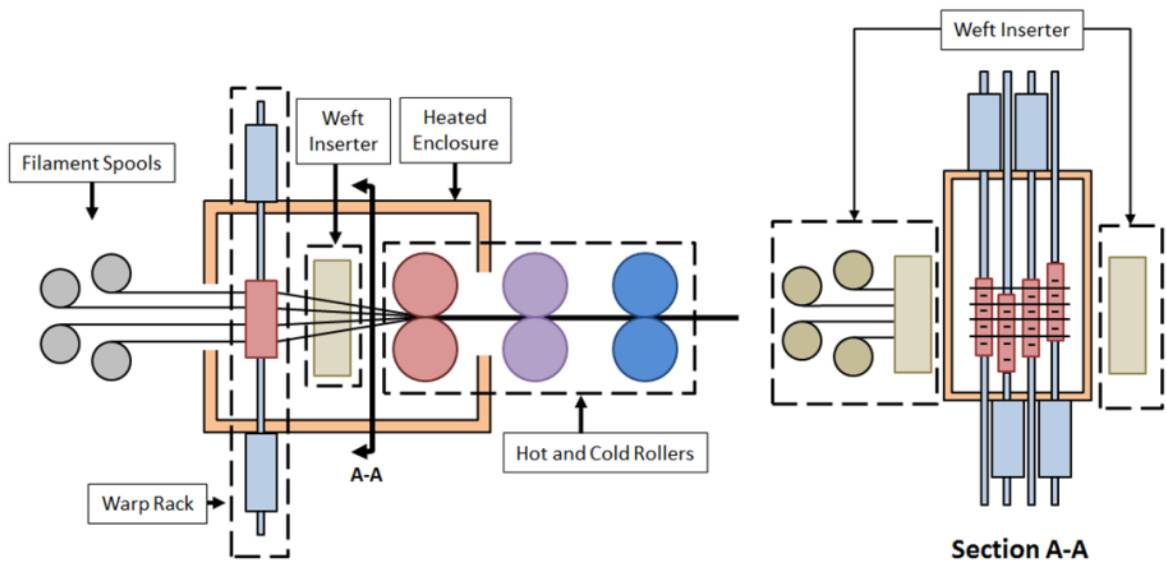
Diagram of WEAV3D machine. Left panel shows the side view of the machine. Filament spools shown in the left panel are warp filaments. Right panel is a cutaway along Section A-A, showing the warp rack and weft inserter in detail. Filament spools shown in the right panel are weft filaments.
